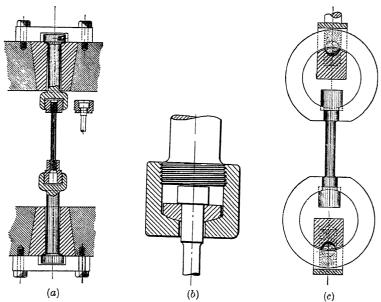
Holders for Tension Specimens with Screwed or Shouldered Ends
